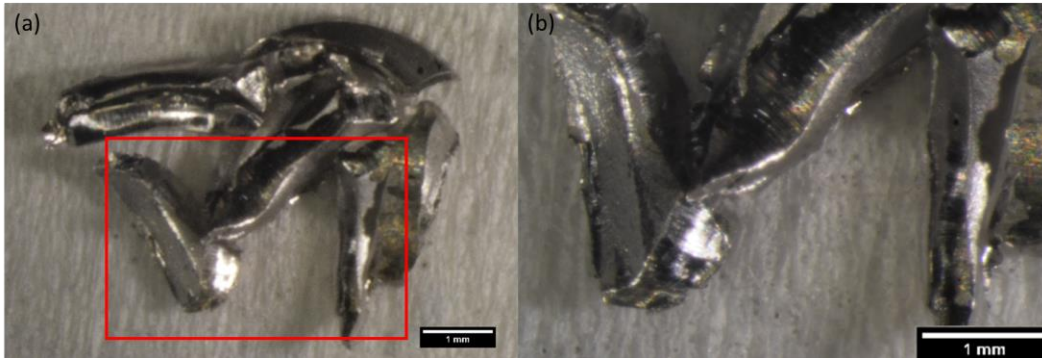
(a) Representative optical image of thick stainless steel machining chips at low-magnification. (b) Surface morphology of machining chips in the boxed area in (a) at a high-magnification.
